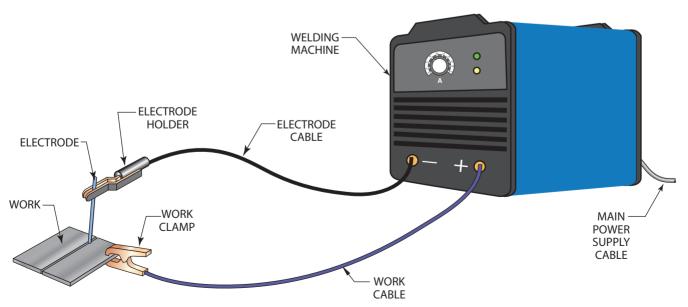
Shielded metal arc welding equipment.
